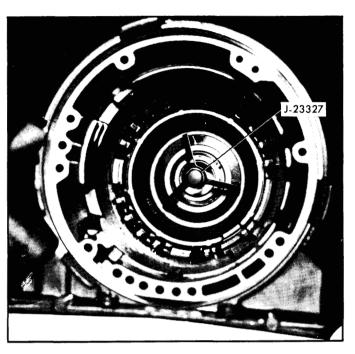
Compressing Low and Reverse Clutch Piston Spring Retainer
